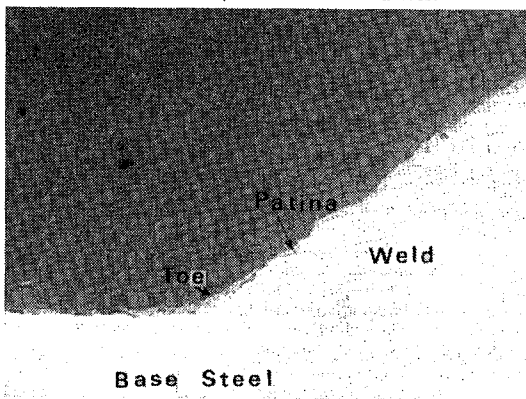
Typical fillet weld toe of 4-year weathered fillet welded specimen.
